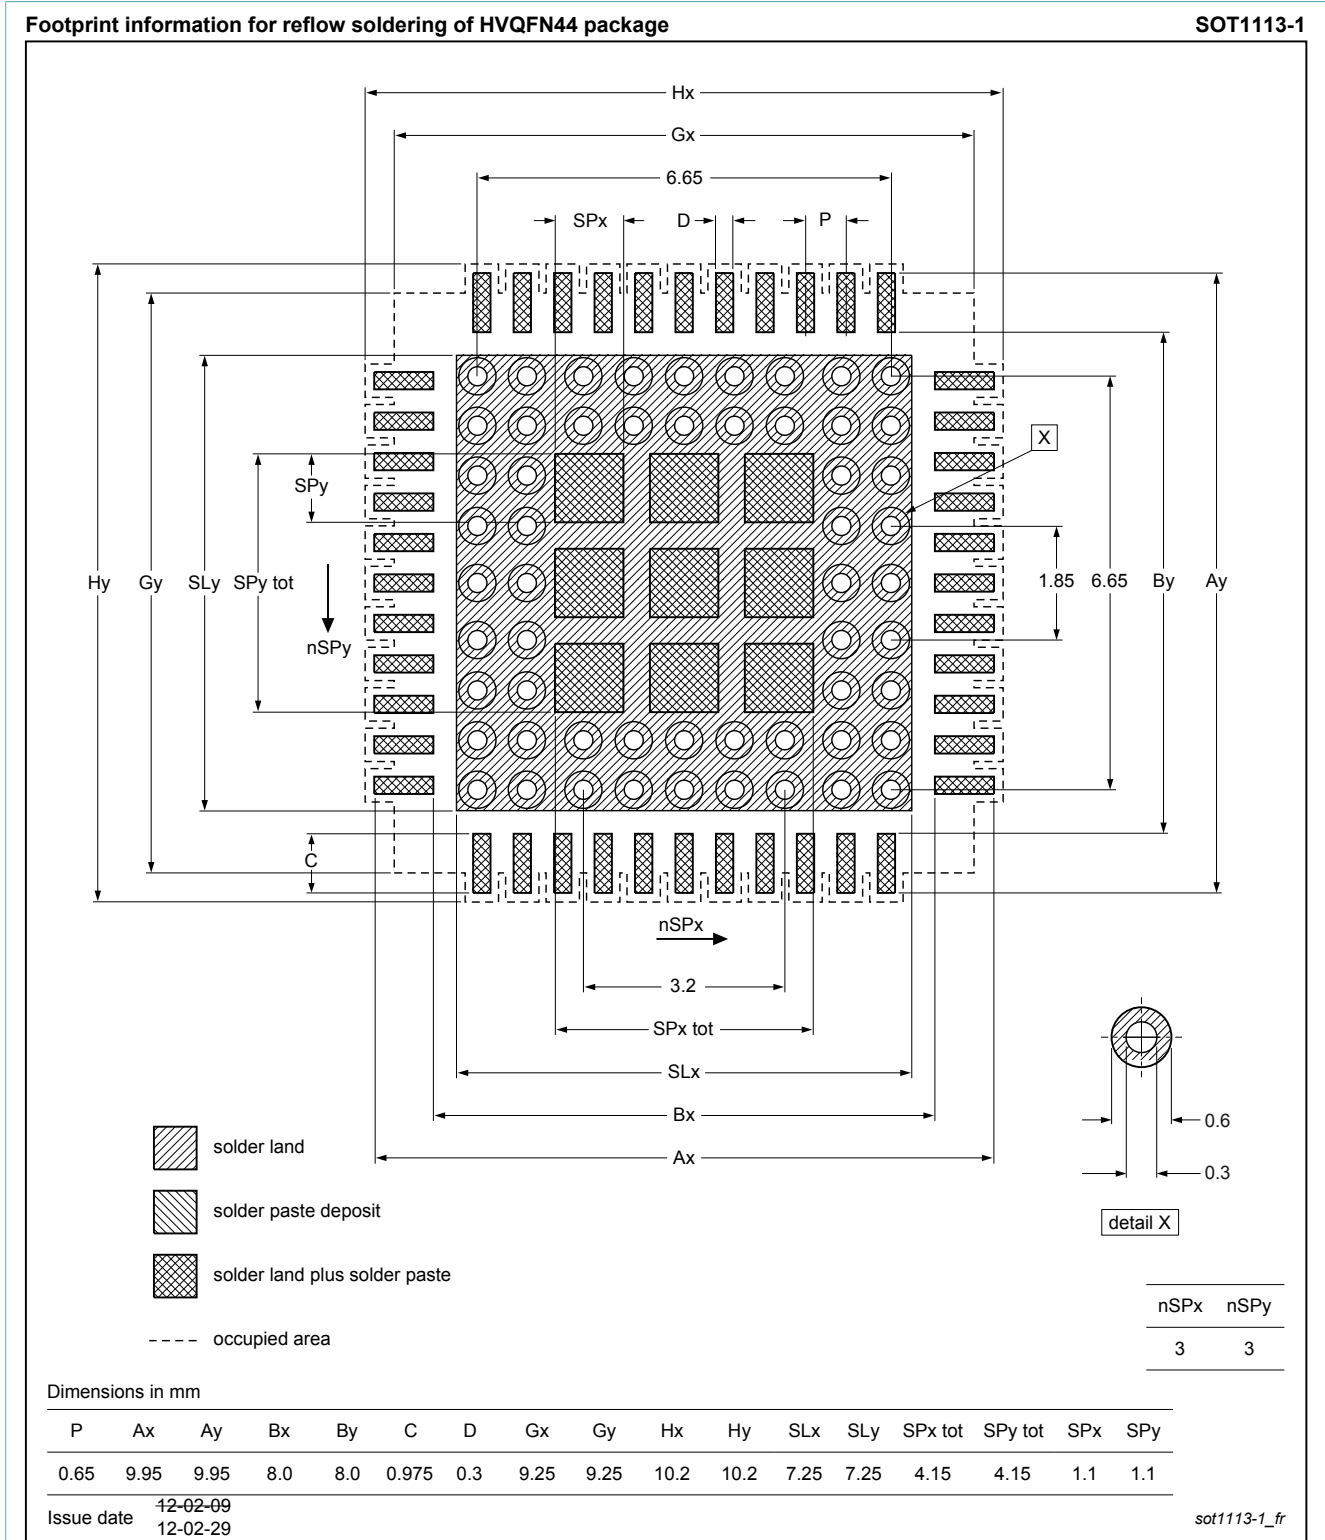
Reflow soldering footprint for HVQFN44 (SOT1113-1)
